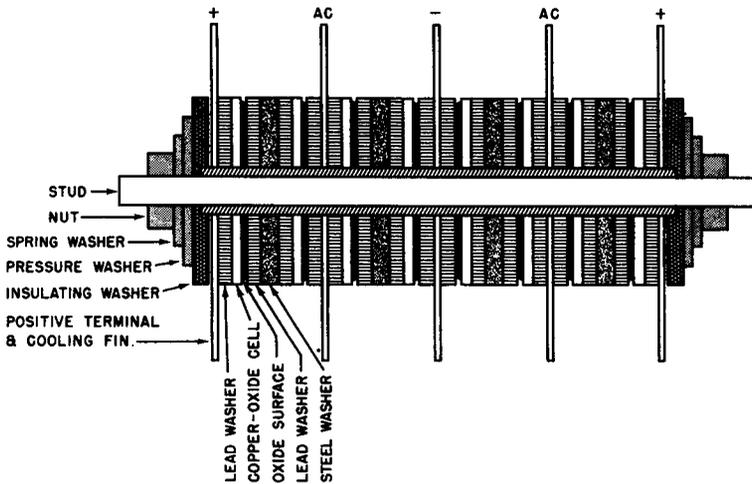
Cutaway View of a Full-Wave, Copper-Oxide Rectifier Stack Assembly.
